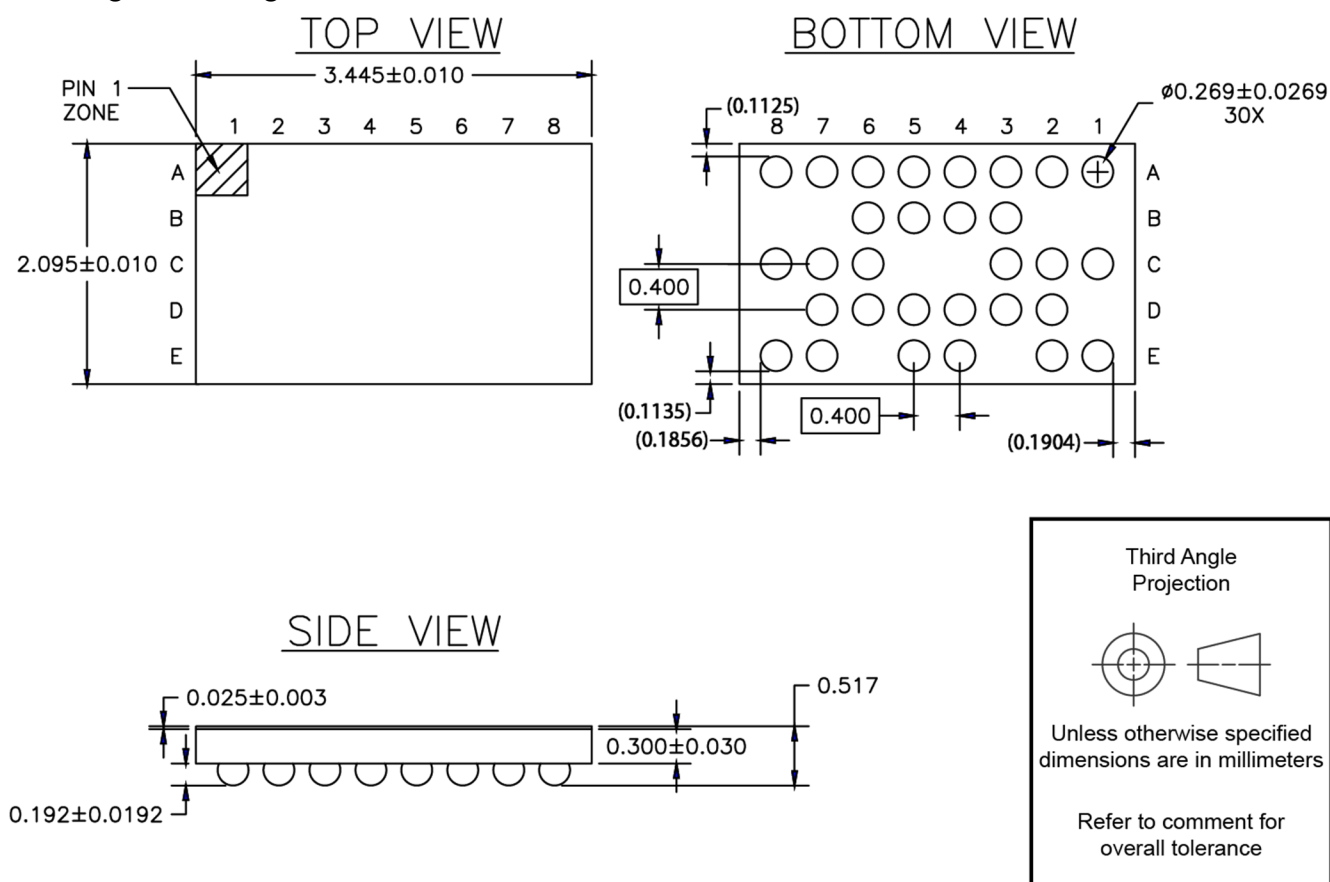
3.445 mm x 2.095 mm WLCSP Package Mechanical Drawing
